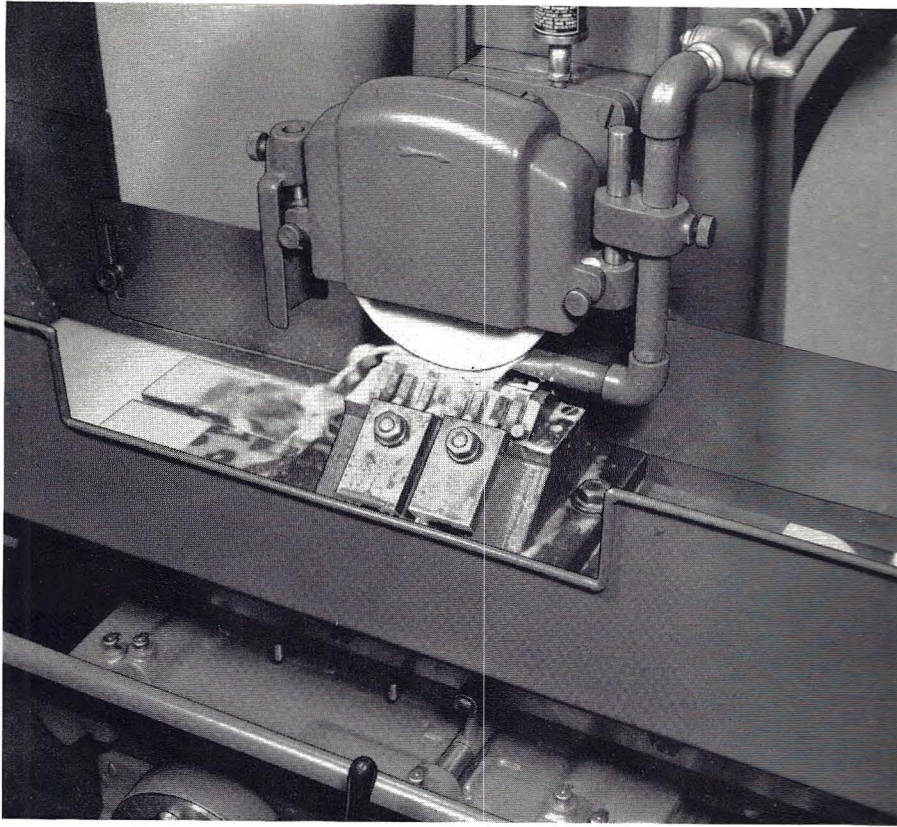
A typical production set-up for grinding the ends of small pieces at an angle. The work is held in a fixture, and 16 pieces are ground at each loading. An ample flow of coolant provided by the Wet Grinding Attachment prevents heating of the work, thus permitting heavier cuts without loss of accuracy through heat distortion, and also takes care of the grit and dust produced.
